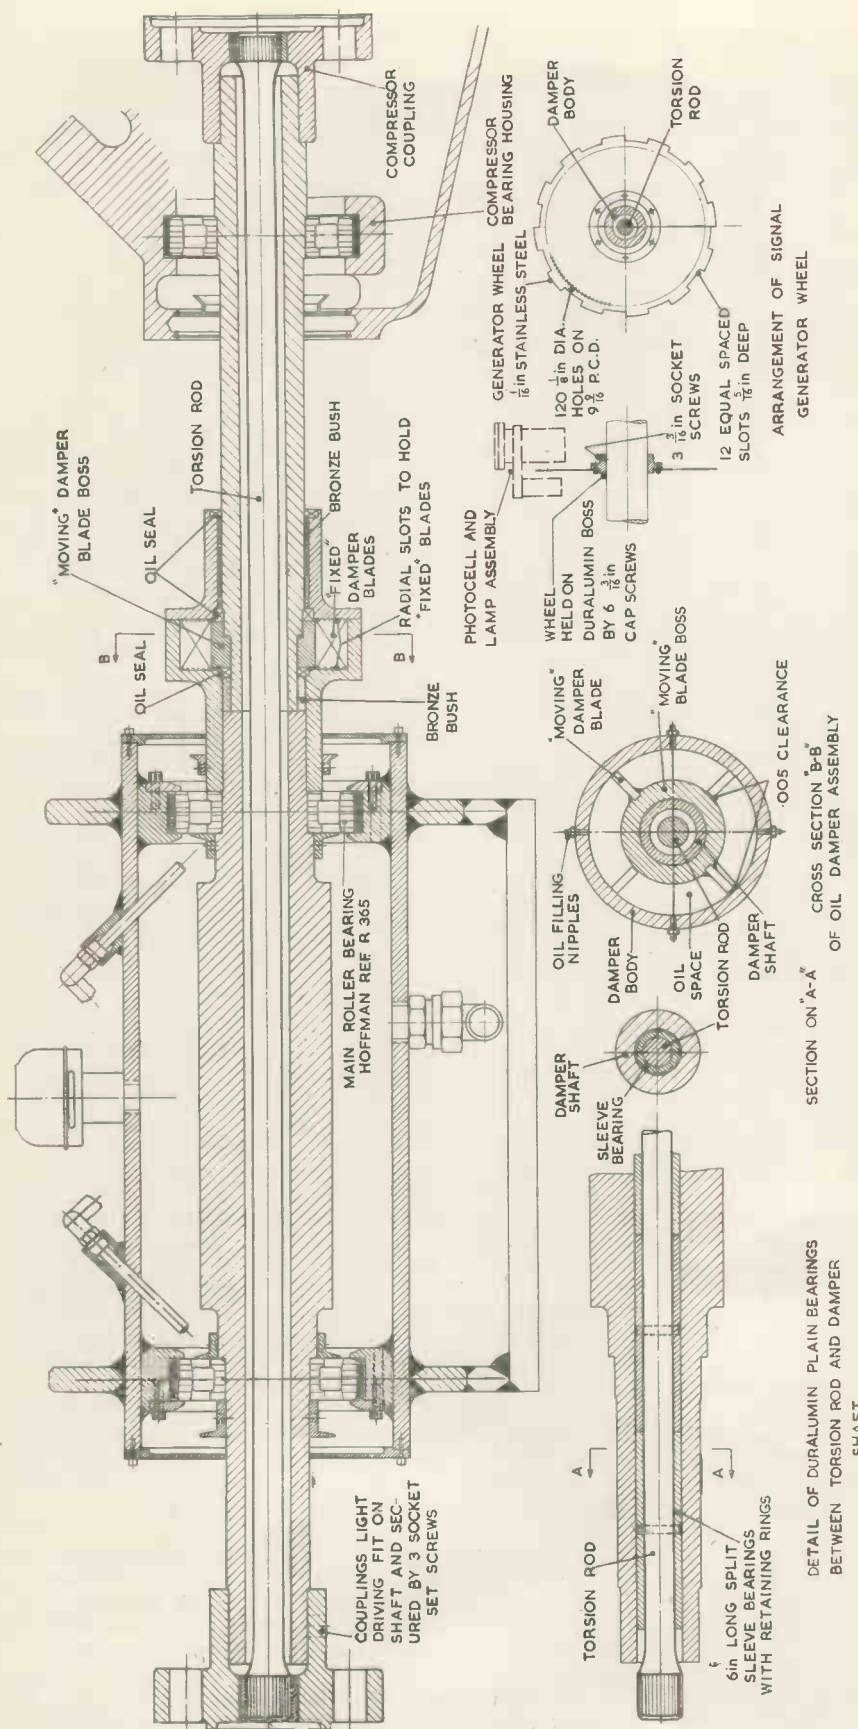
General arrangement of torsion rod assembly for 11 000 rev/min 500kW torquemeter
